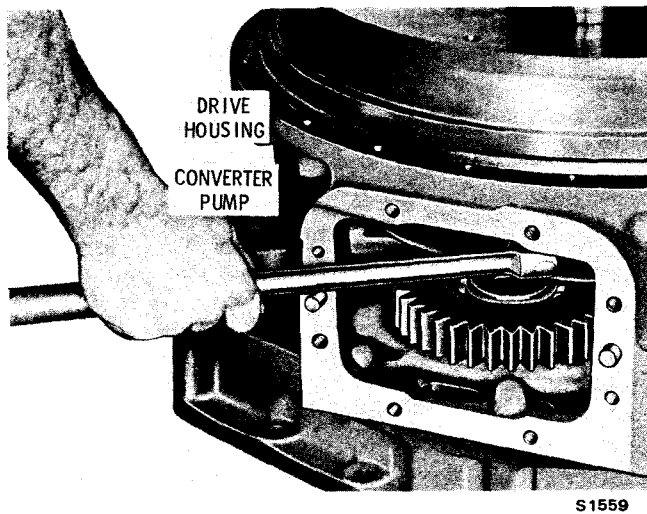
Removing converter drive housing bolts (remote mount)
